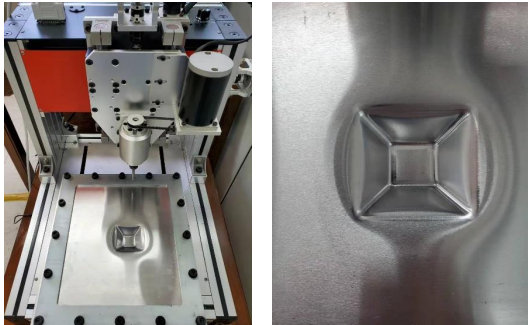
Three-axis CNC milling machine and target geometry of the part
